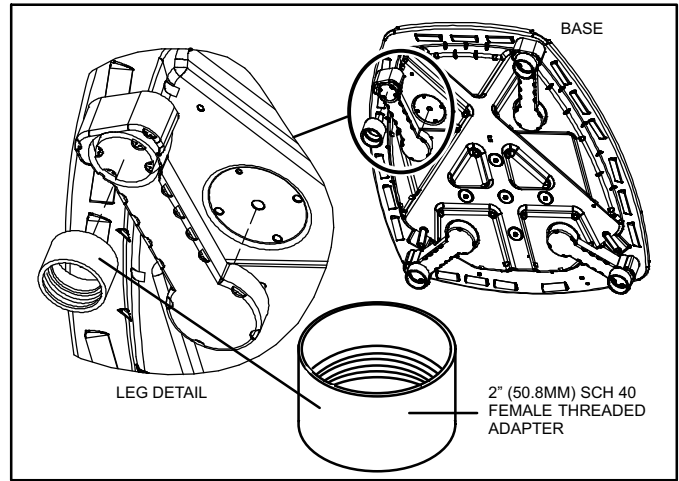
Elevated Slab Mounting using Feet Extenders (Small Base Units)
